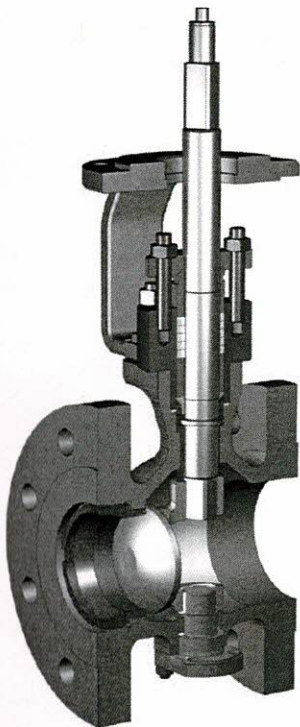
Eccentric rotating plug valve (courtesy of Flowserve).
